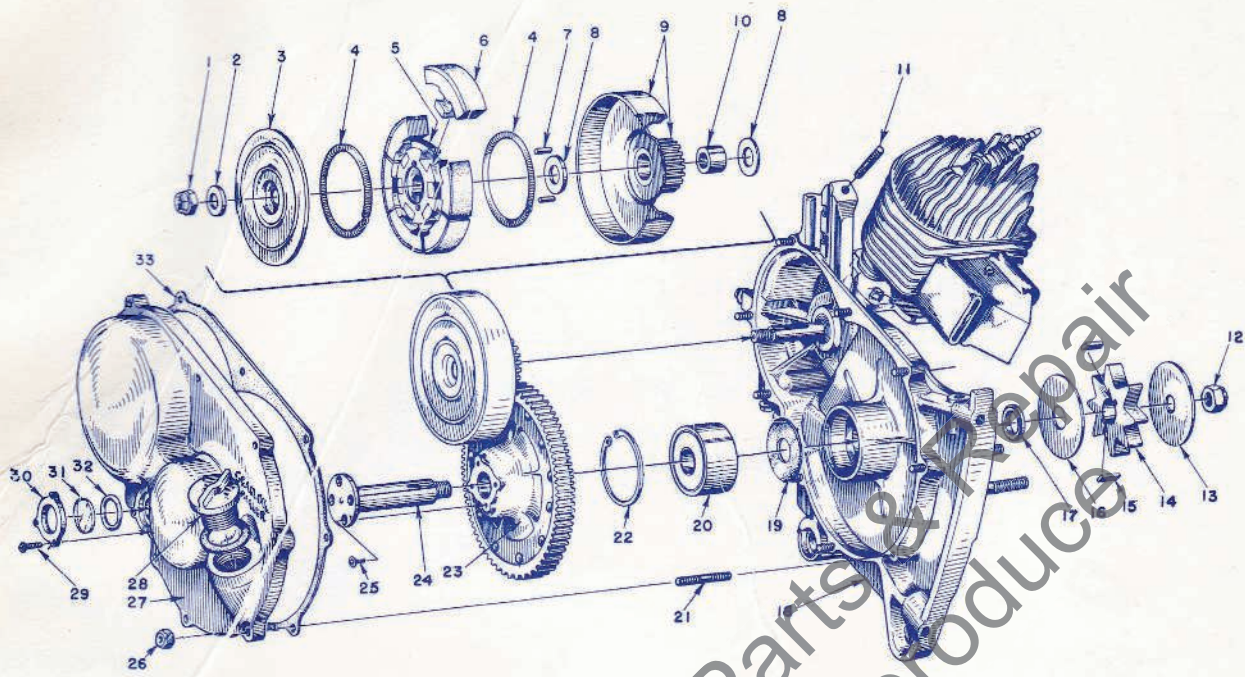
GEAR CASE AND SPROCKET PARTS
